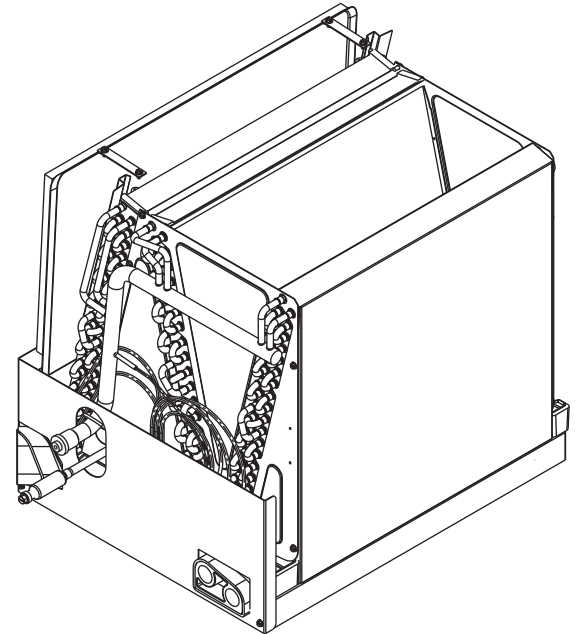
UNCASSED COIL ADAPTER KIT ASSEMBLED
